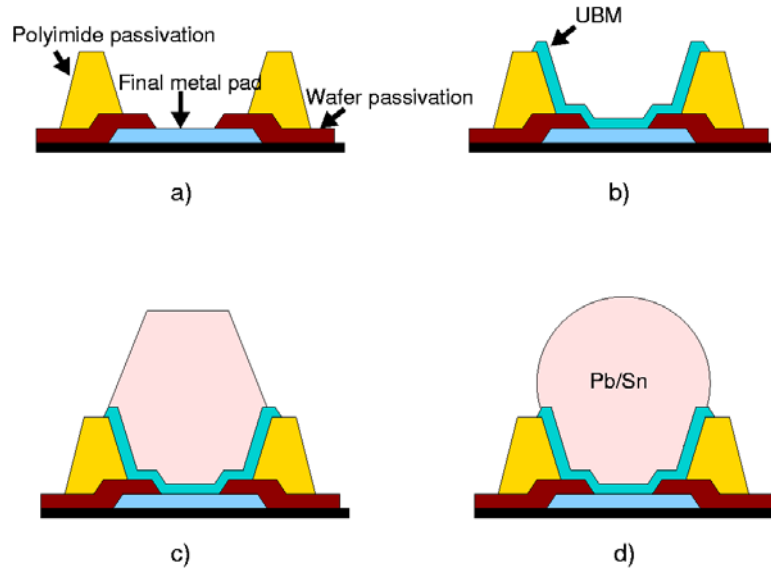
Main steps in a common solder bump-bonding procedure. a) wafer cleaning, b) UBM deposition, c) Solder deposition and d) reflow to form solder bump.
